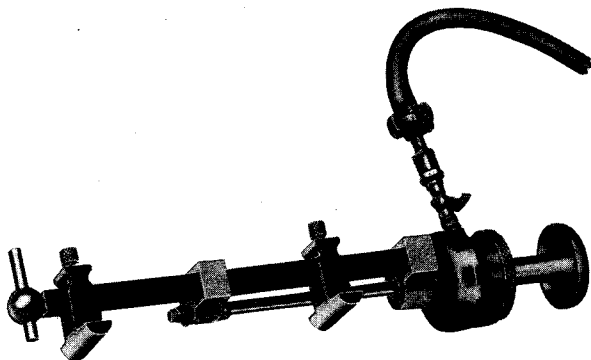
SMALL PORTABLE TOOL FOR UNDERCUTTING MICA, ATTACHED TO AIR MOTOR
